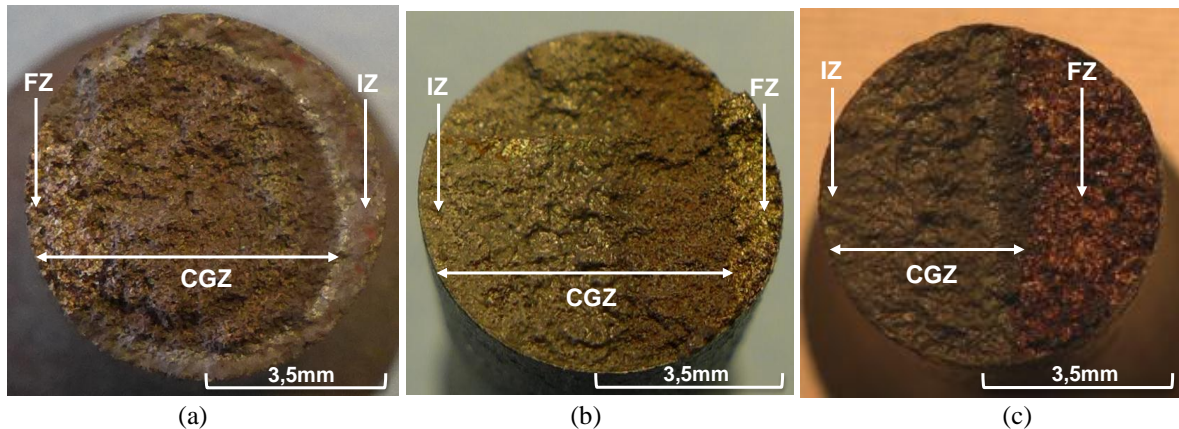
Images showing initiation zone (IZ), crack growth zone (CGZ) and fracture zone (FZ) on the fracture surfaces of SiMo51 tested with LCF at 700°C in a) Ar+1%H₂ (ϵ_{amp} 0.25%), b) air (ϵ_{amp} 0.25%) and c) diesel exhaust gas (ϵ_{amp} 0.20%).
